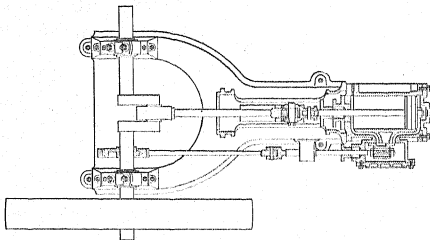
Sectional Plan of a Simple Horizontal Steam Engine
